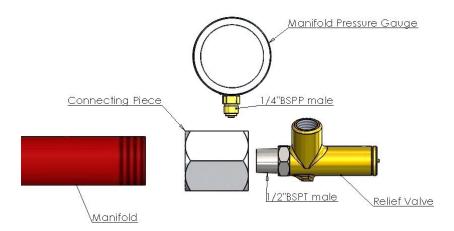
DPS/Relief Valve/ Manifold Gauge Connection Diagram
